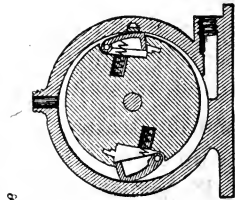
,347.—No. 4. The piston wheel is arranged eccentrically within the cylinder, and has two buckets, which are expanded radially by springs, and withdraw to pass the abutment by contact with the cylinder. Packing segments on the piston wheel and the edges of the buckets confine the steam.
